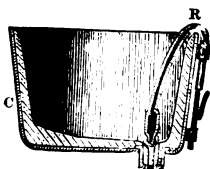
Bessemer Casting Ladle. C, Casting ladle. R, Iron rod.
